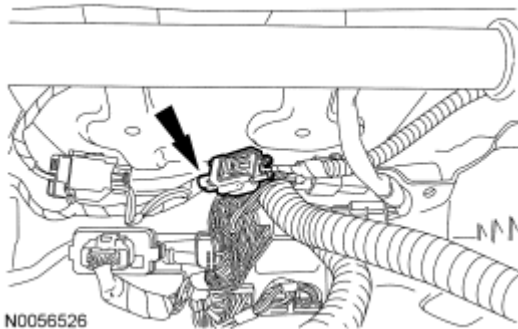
Identifying Passenger Seat Side Air Bag Module Electrical Connector
